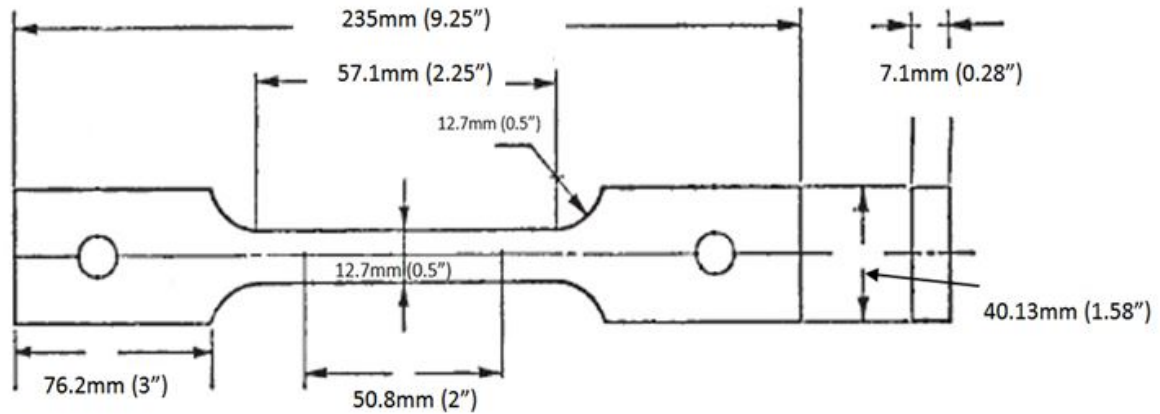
Tensile test sample dimensions (All dimensions are in mm.)
